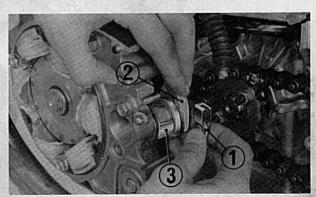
(1) Clutch lifter (2) Fixing piece (3) Clutch adjuster
